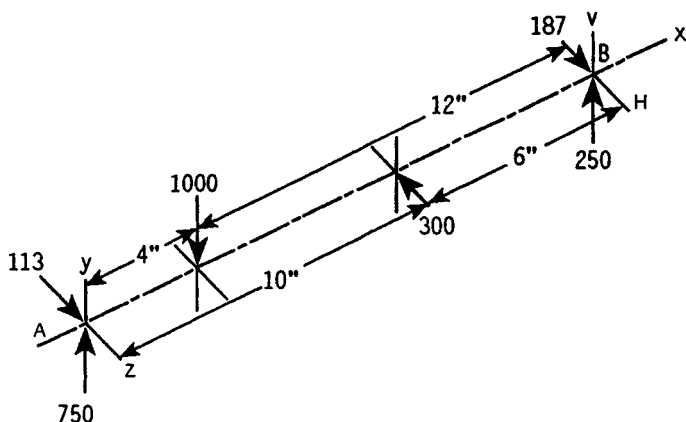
A shaft carries two spur gears between bearings A and B. The gear loads and reactions are shown.
